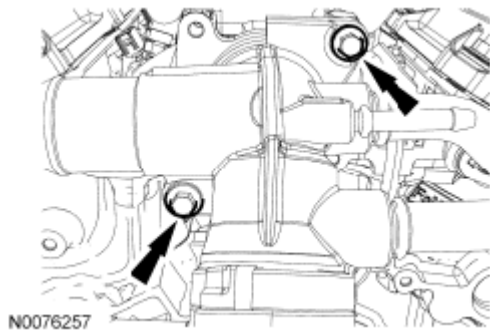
Locating Thermostat Housing-To-Lower Intake Manifold Bolts
